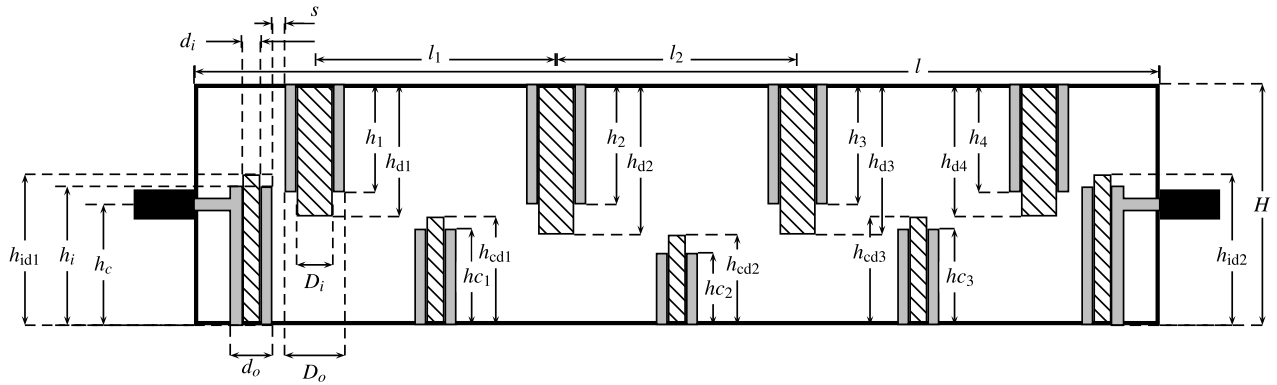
Side view of the filter structure. The filter is symmetric and the most relevant dimensions used in the design are shown.
